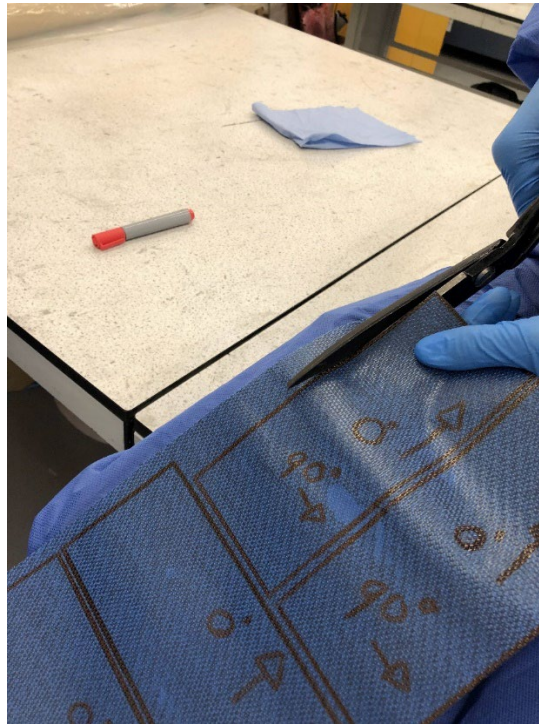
showing lower laminates marked out for cutting with warp fibres in the 0° direction.
